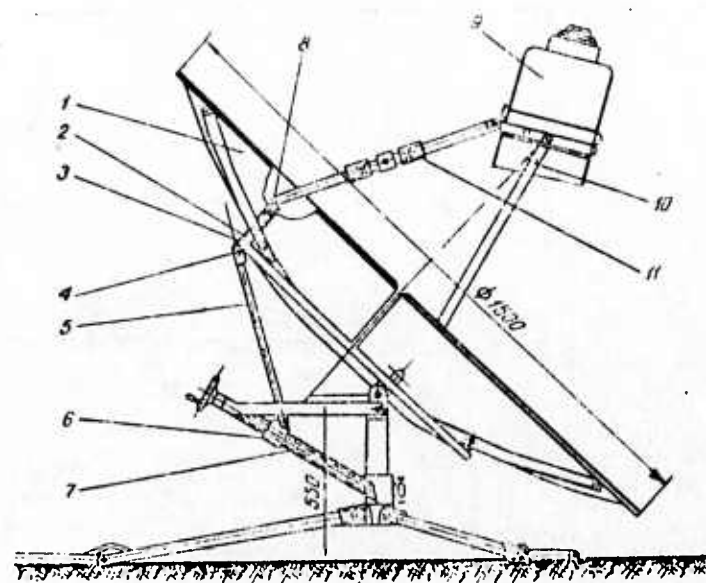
Schematic of a collapsible solar cooker, USSR, (dimensions in mm) [134].
